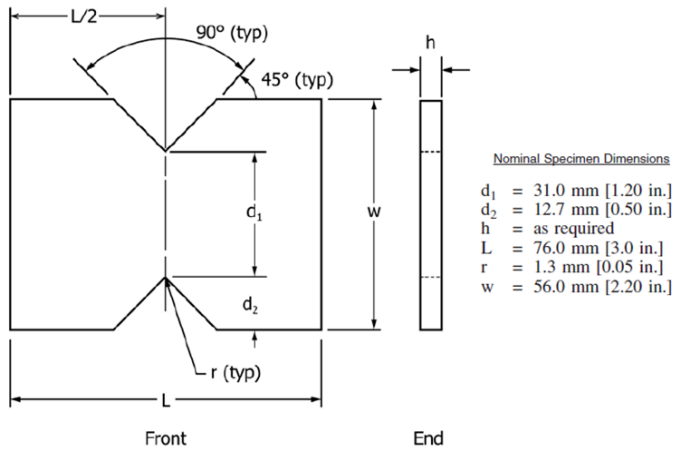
Nominal dimensions of a V-notch rail shear test specimen
